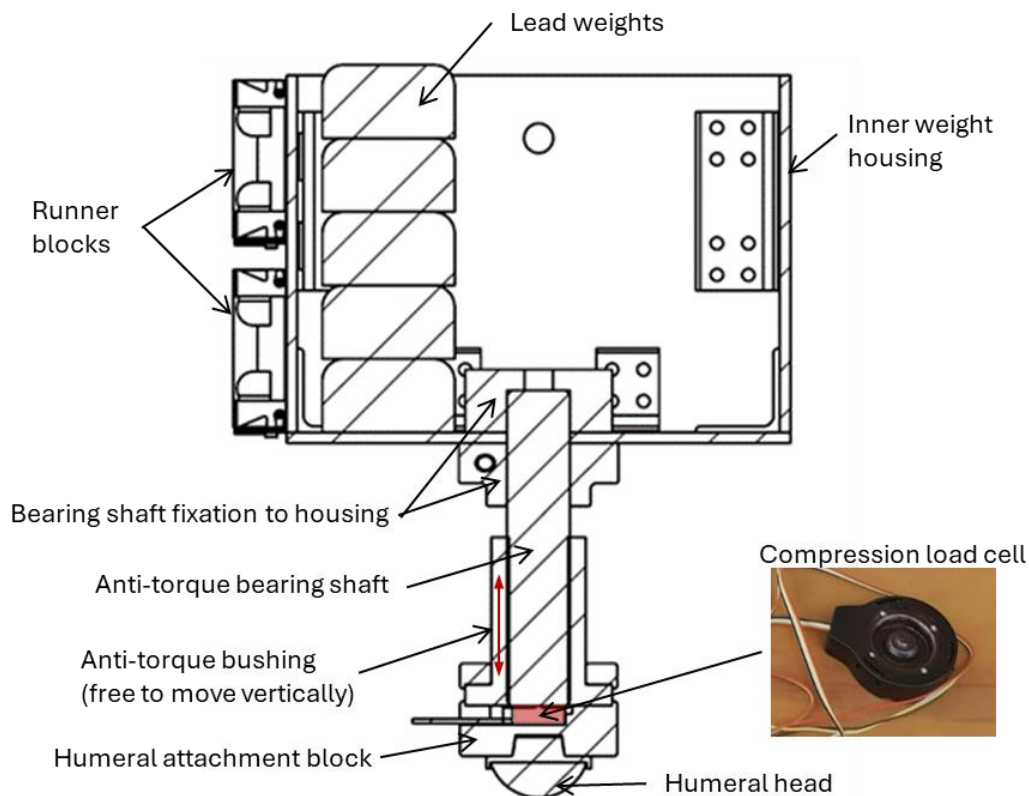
Cross section of the inner weight housing and HH assembly. The HH assembly is attached to a torque-resistant bushing and bearing shaft pair. The HH assembly is free to move in the vertical direction as the bushing slides on the bearing shaft. A compression load cell is inserted between the base of the bearing shaft and the HH. This configuration allows the weight of the inner weight housing to be supported by the load cell, allowing measurement of the applied normal load.
